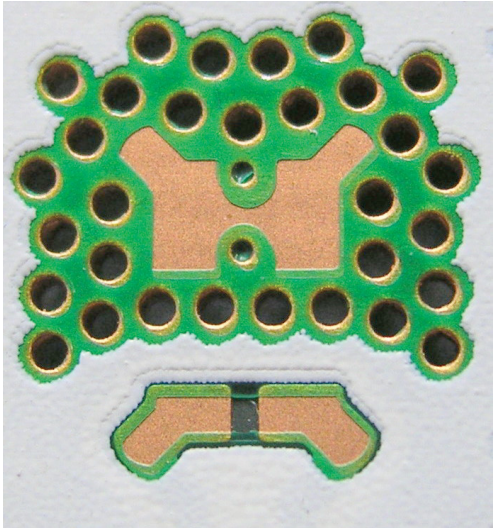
Solder pad layout for LUXEON Rebel PLUS.
